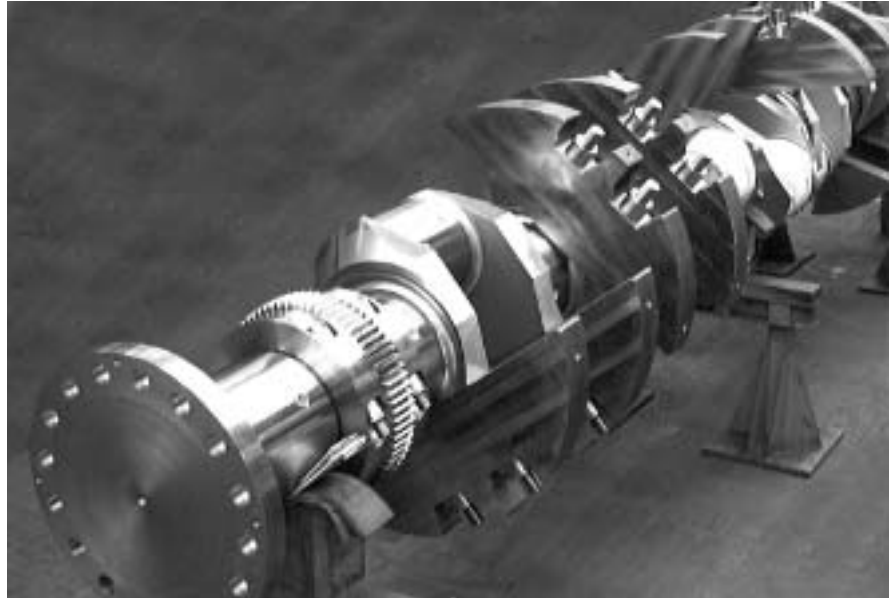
Crankshaft with camshaft drive gear and attached counterweights
